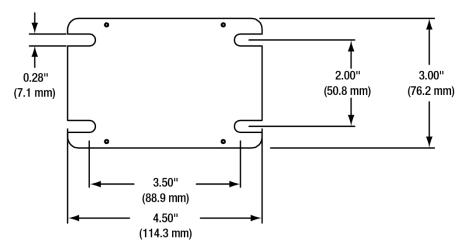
Mechanical drawing of an MPM250 base plate. Dimensions for the MPM250/M base plate are given in parentheses.
